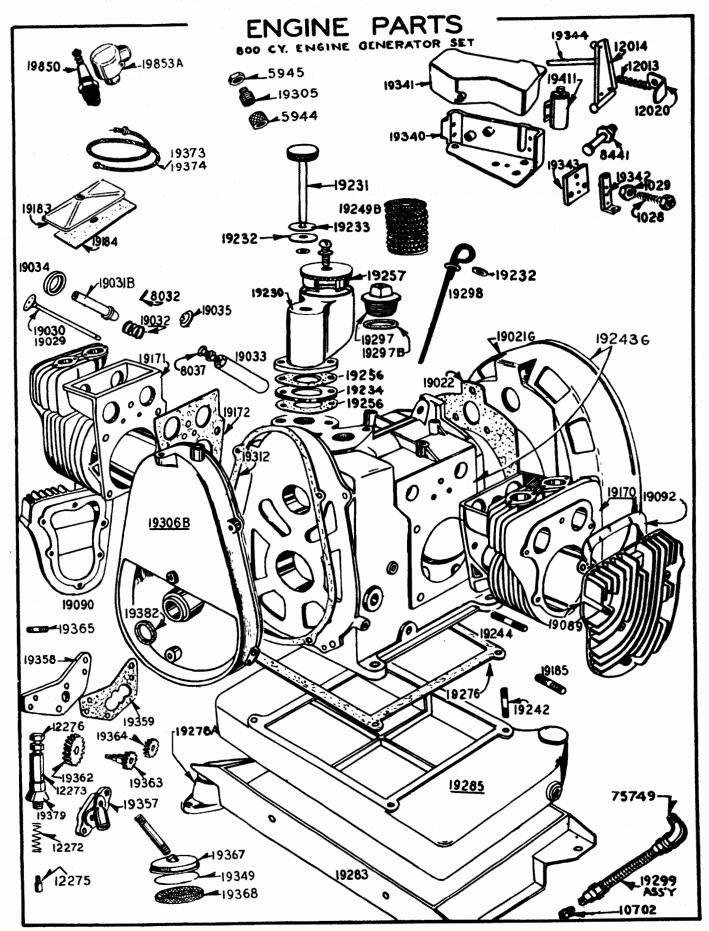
Engine Parts, Main Components for Engine Generator Set Type CDO-73004-A.
